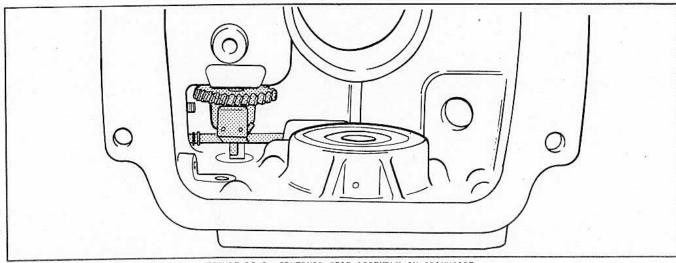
GOVERNOR GEAR ASSEMBLY IN CRANKCASE
